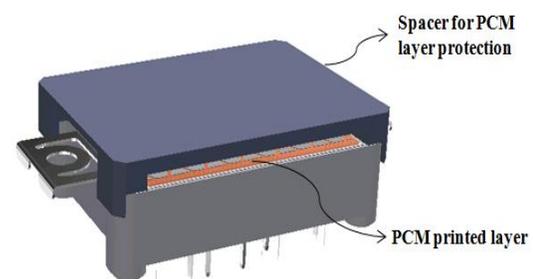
Example of Spacer to Protect PCM Printed Layer during Soldering Process
